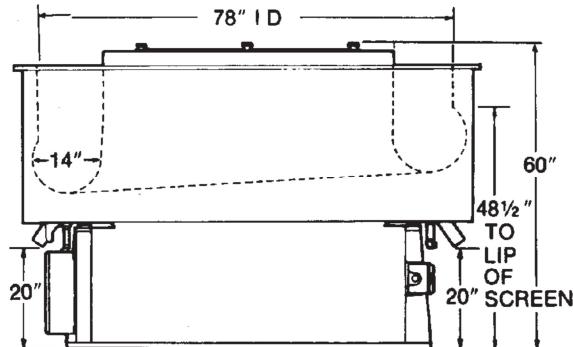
Dimensions of a 20-cu ft (6000 pound load) 20-hp bowl machine liner has 1 in. minimum thickness in high wear areas (Beck & Maudlin 1979)
